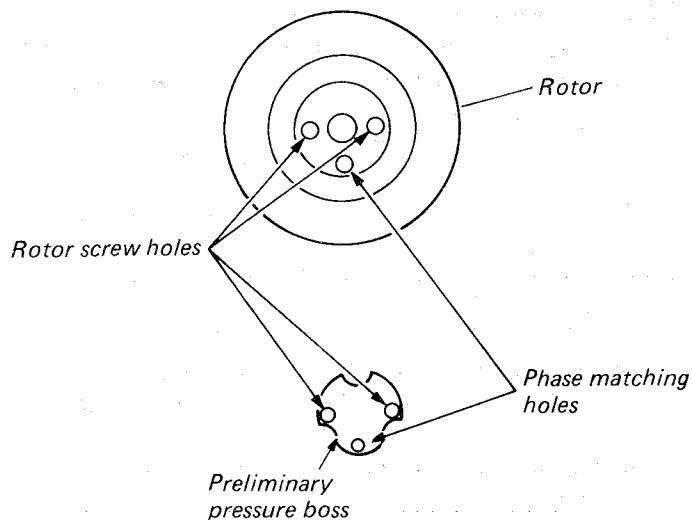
Phase matching between rotor and preliminary pressure boss
